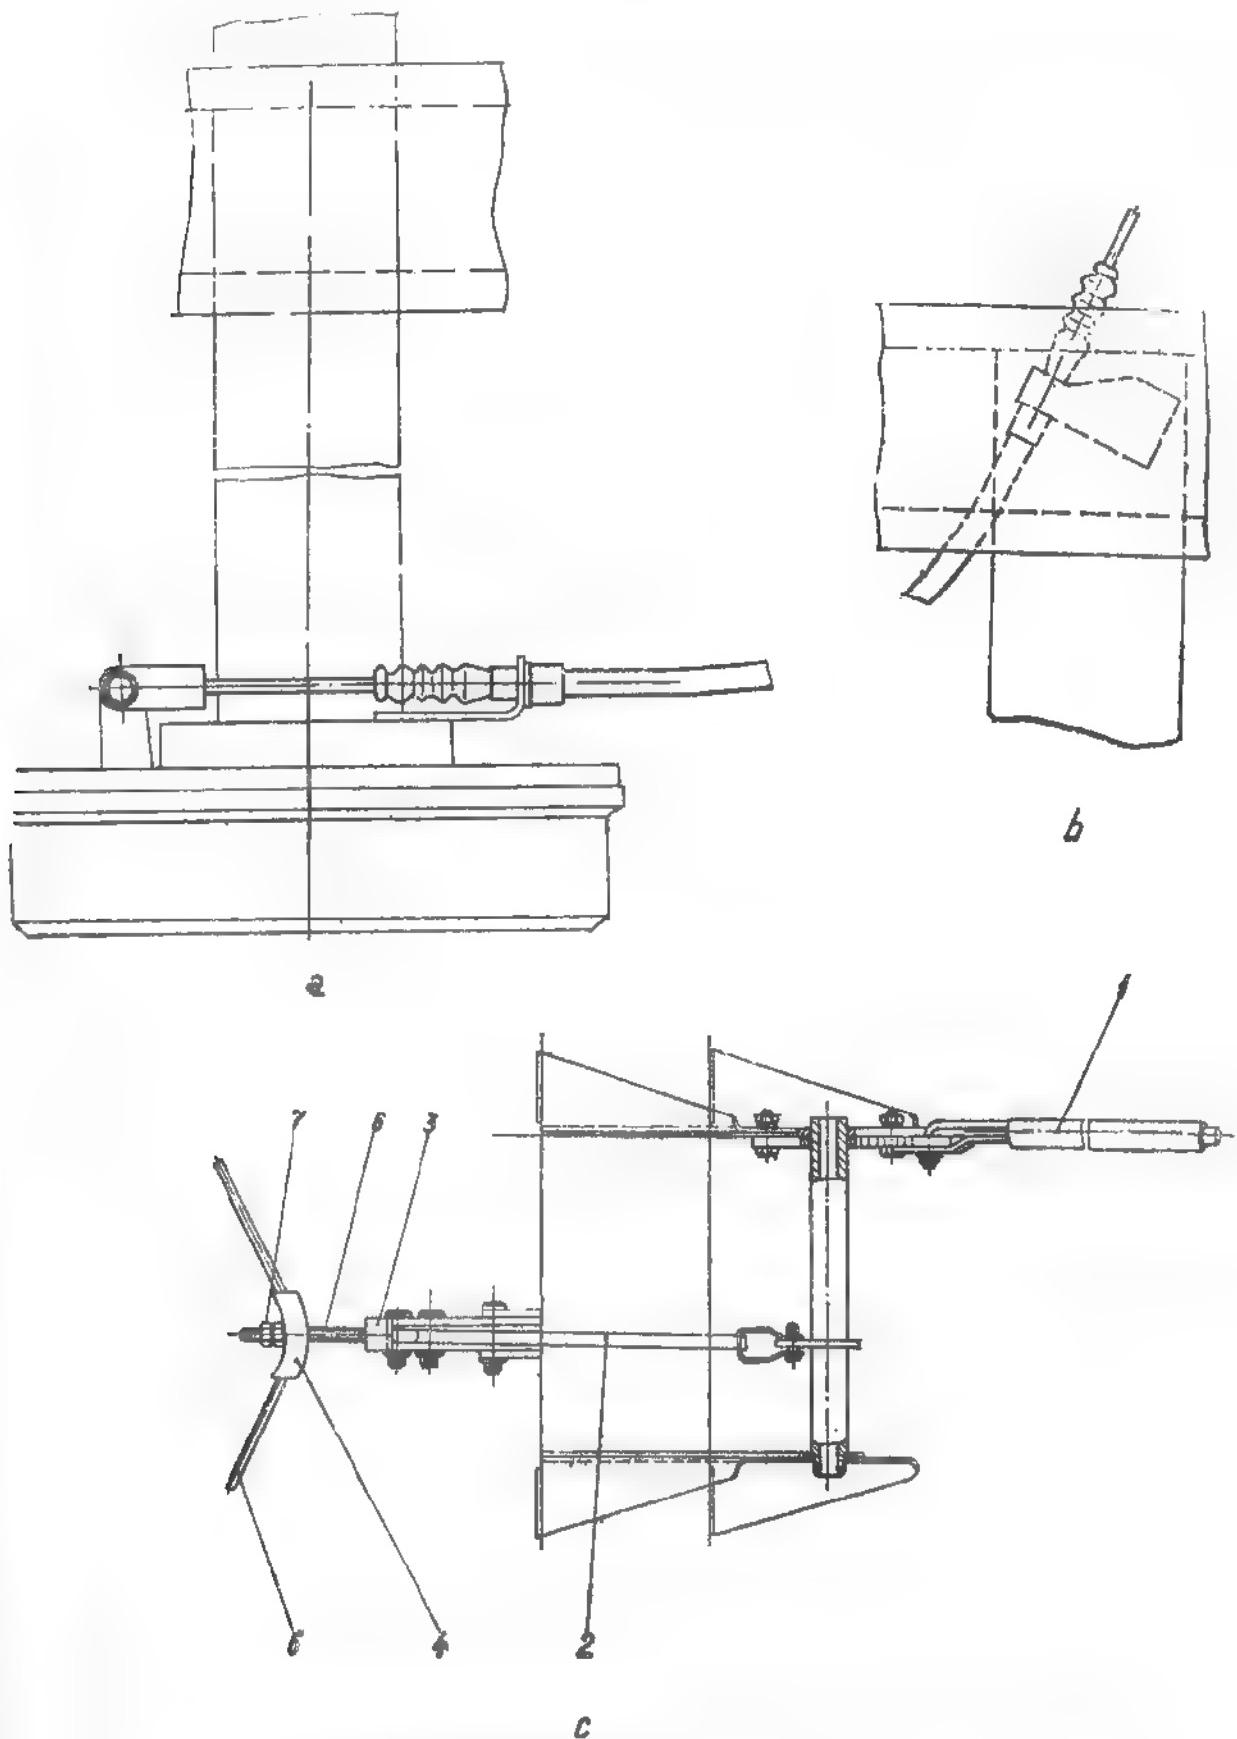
149. HAND BRAKE CONTROL - TYPE II
